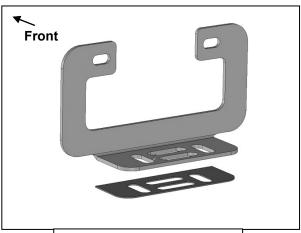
Driver/left bumper bracket assembly with sensor and bracket
